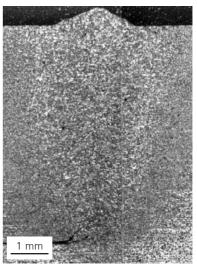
Laser weld joint of C45 / C45 (AISI 1043):
